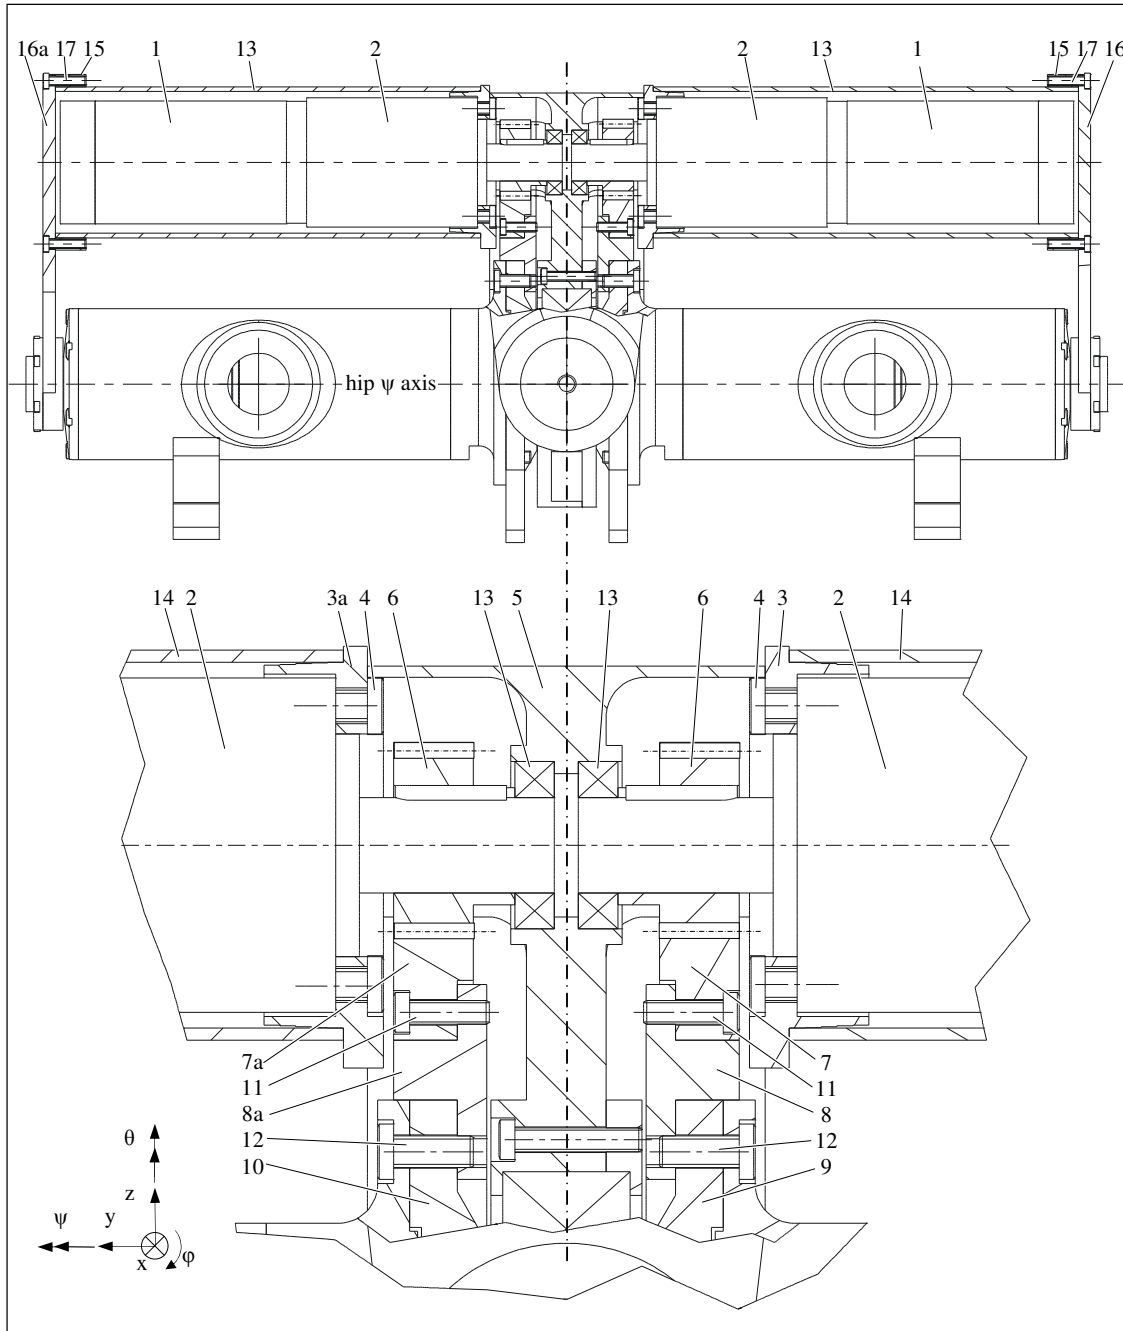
Actuation of the  $\psi$ -tubes in a posterior break out view (above) and a detail of this (below): DC Motor (1), planetary gearbox (2),  $\psi$ -motor bracket (3,3a), M4 bolts, waist (5), pinion gear (6), ring gear segment (7,7a), extension ring segment (8,8a), bearing flange (9,10), M3 bolts (11), M4 bolts (12), deep groove ball bearings (13),  $\psi$ -motor tube (14), end ring (15), end plate (16,16a) and M3 bolts (17).
